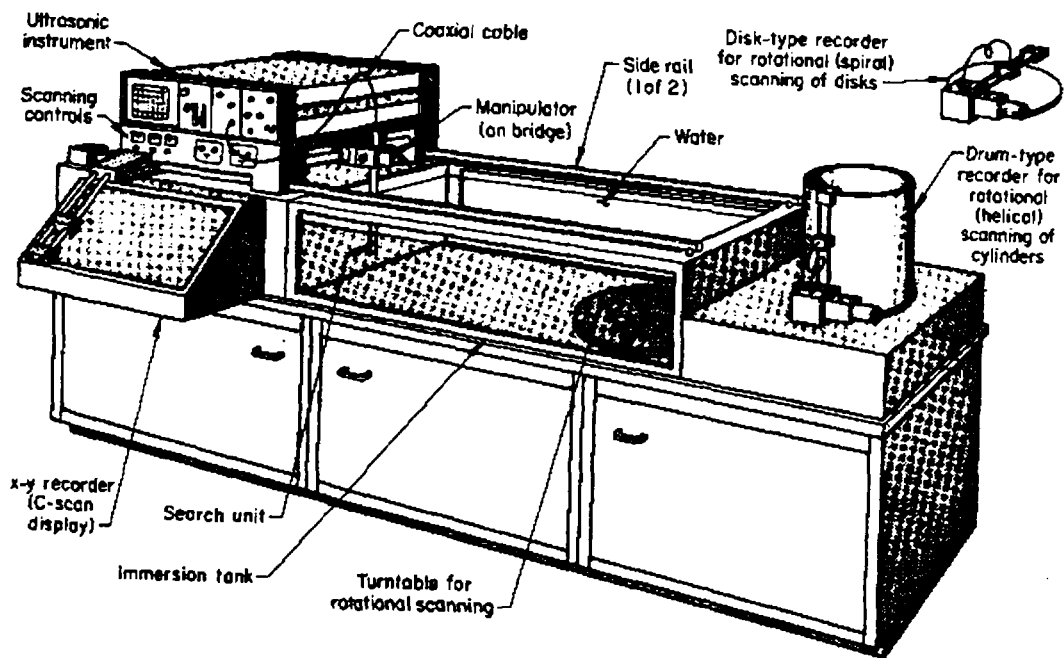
Principal components of a universal unit for immersion scanning of test pieces of various shapes and sizes.
